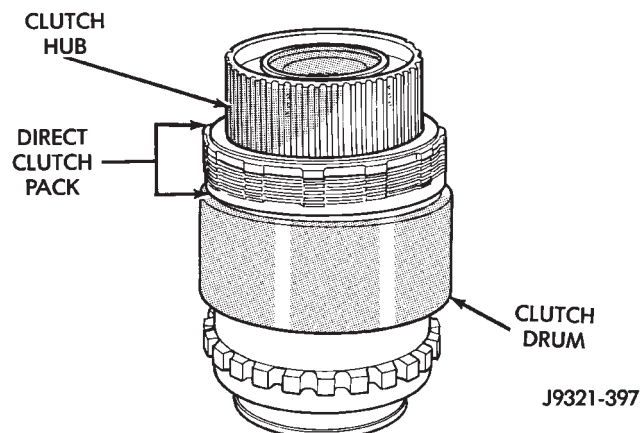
Direct Clutch Pack And Clutch Hub Installation
